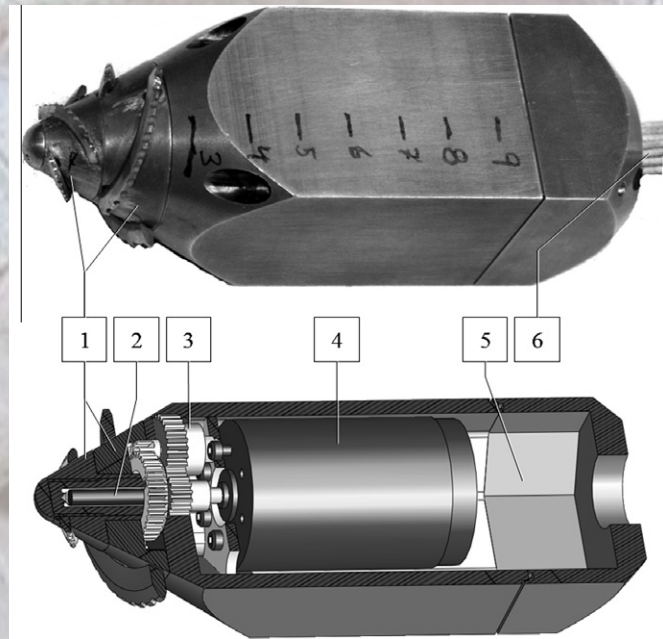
The thermal drill prototype and its internal components: [1] rotary blades, [2] cartridge heater (four others in the corners are not shown), [3] gear, [4] motor, [5] tether compartment and [6] cable.
